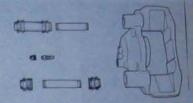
Check the condition of the caliper mounting bushes. September 1985 models onward (Sec 9)
